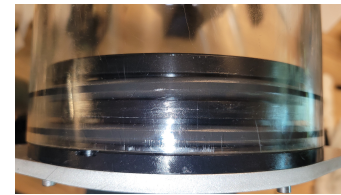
The 3/16" Neoprene O-ring installed into the 8" Blue Robotics Flange
